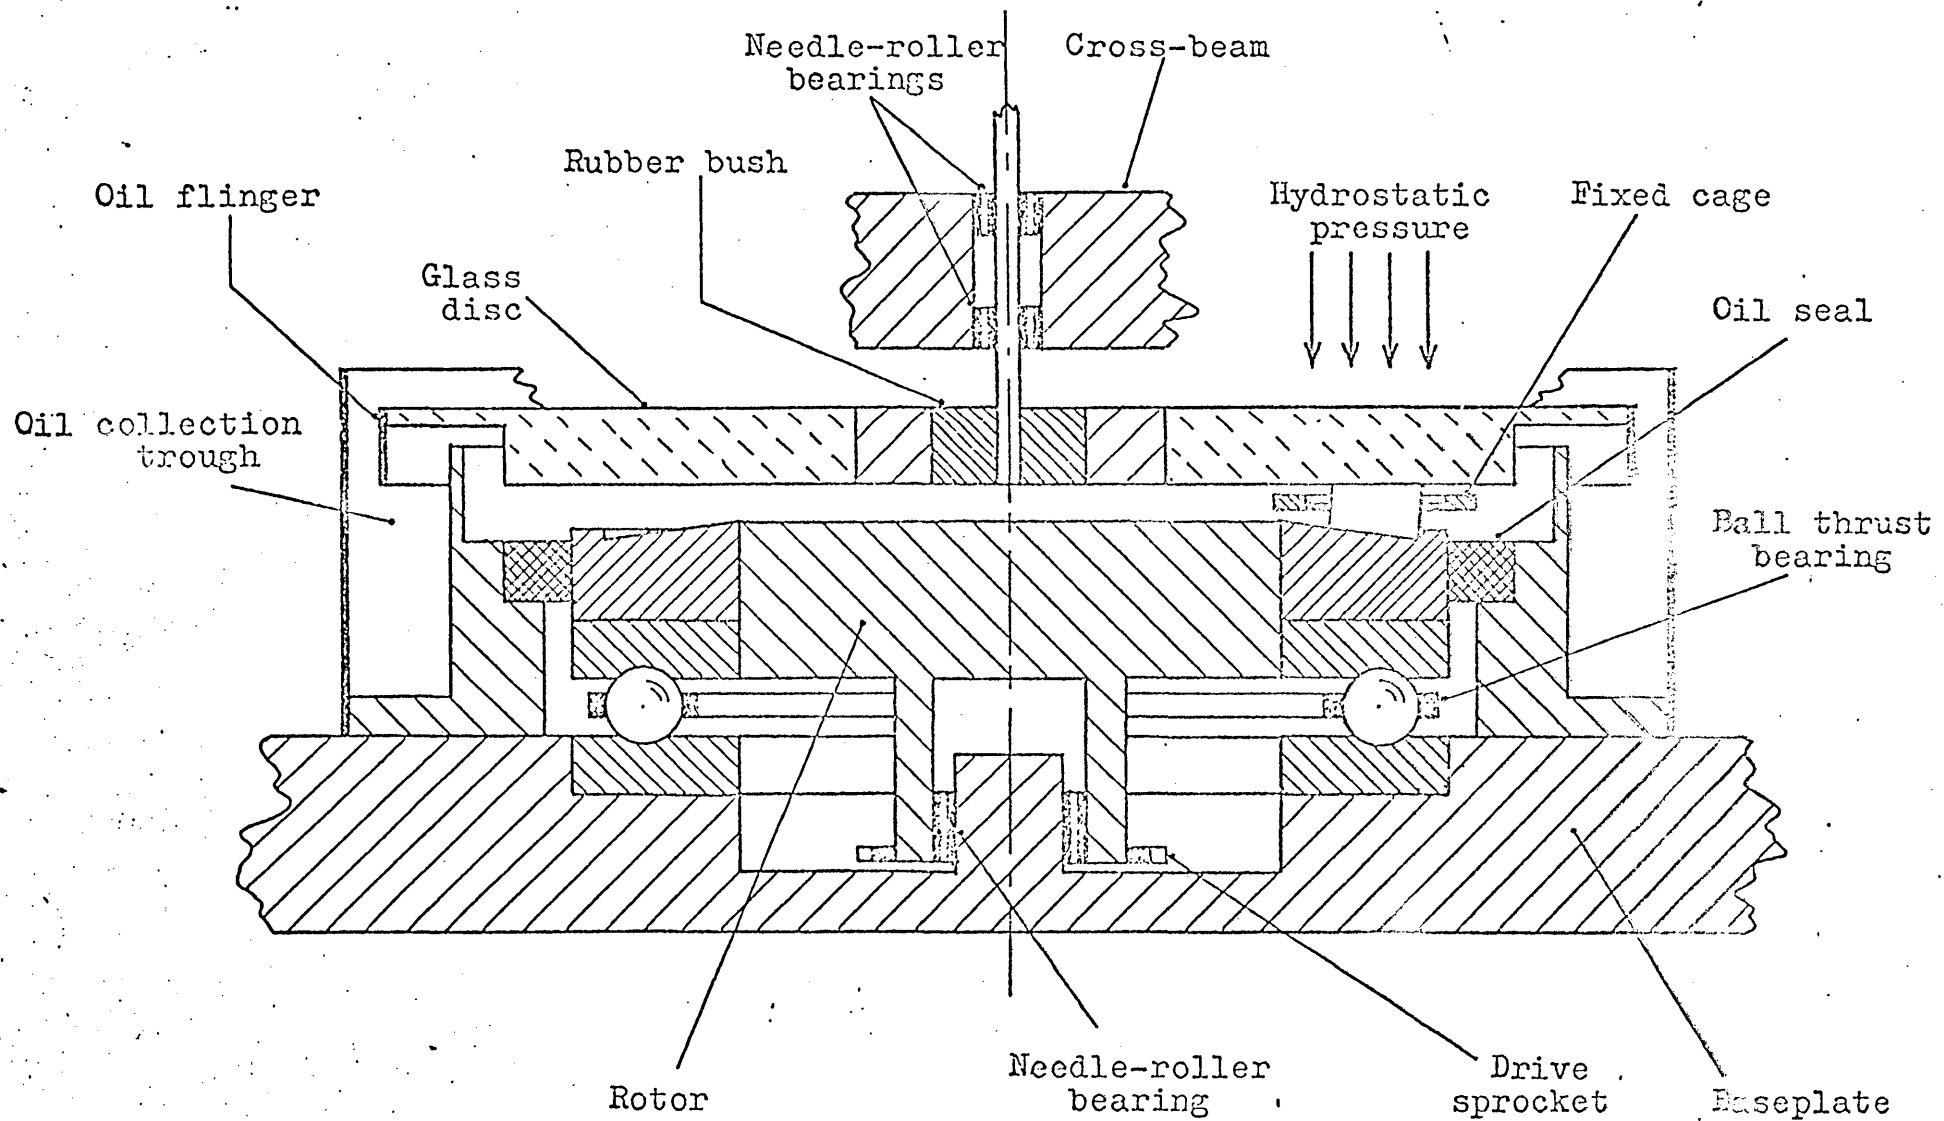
Thrust bearing assembly (loading system omitted)..
